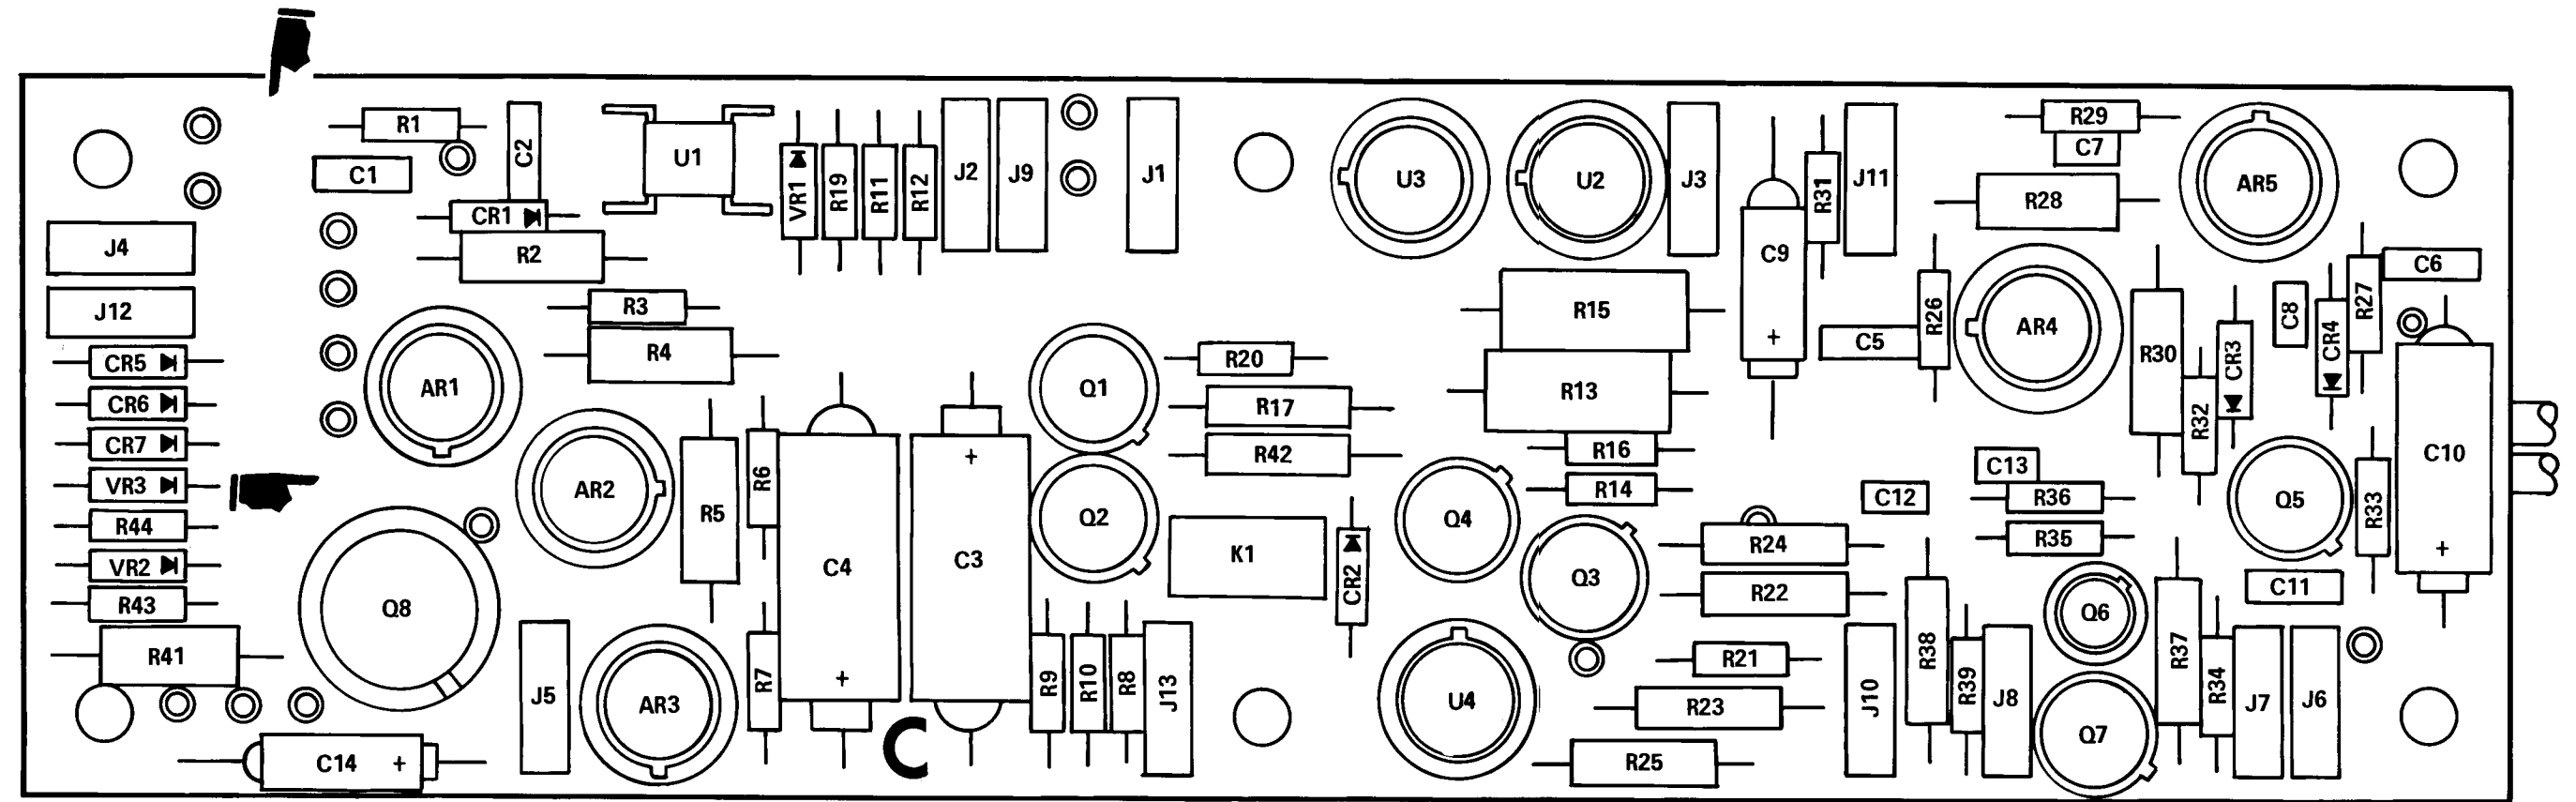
Circuit card assembly 1A10A2 (10278327) - locational diagram
